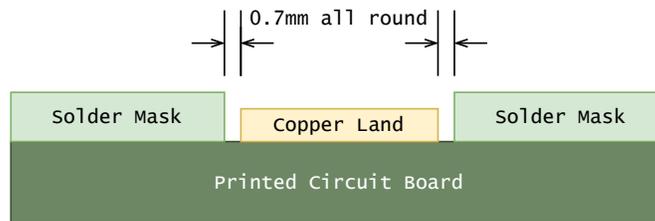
Preferred solder mask opening, side view, dimensions in [mm].
